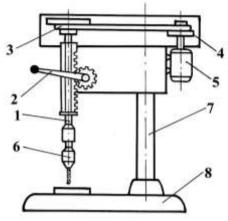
Bench-type drilling machine: 1 – sprindle; 2 – handle; 3, 4 – cone pulleys of V-belt transmission; 5 – electric motor; 6 – chuck with drill; 7 – column; 8 – bed
